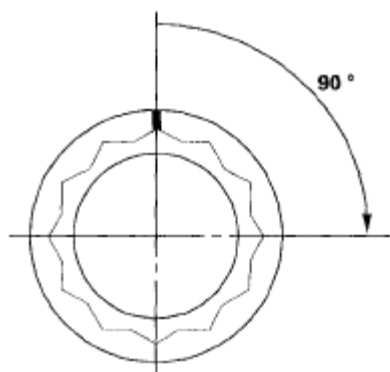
Identifying Connecting Rod Bolt Tightening Angle
